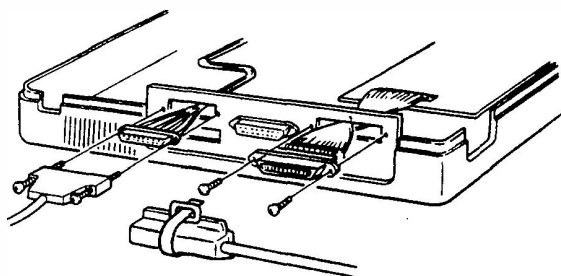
Fastening the J Cable Connectors Using Tie Wraps
